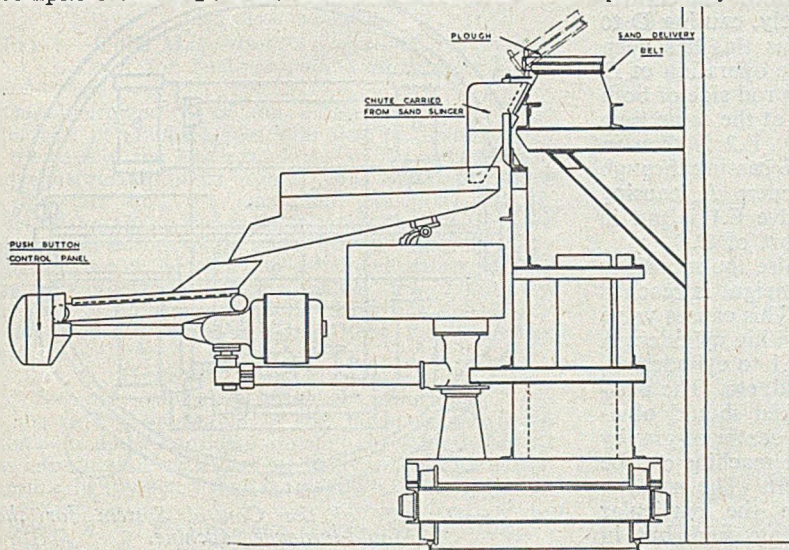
Arrangement adopted for the Sand Feed to the Sandslinger. The Sand-delivery Belt runs on a Continuous Skid Plate instead of Idlers.
